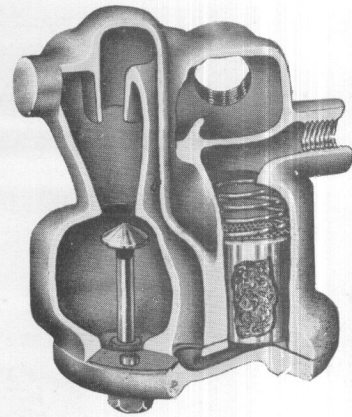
Centrifugal Dirt Collector Tee and Strainer. Shows a branch tee dirt collector incorporating a hair strainer and a removable cover plate.
